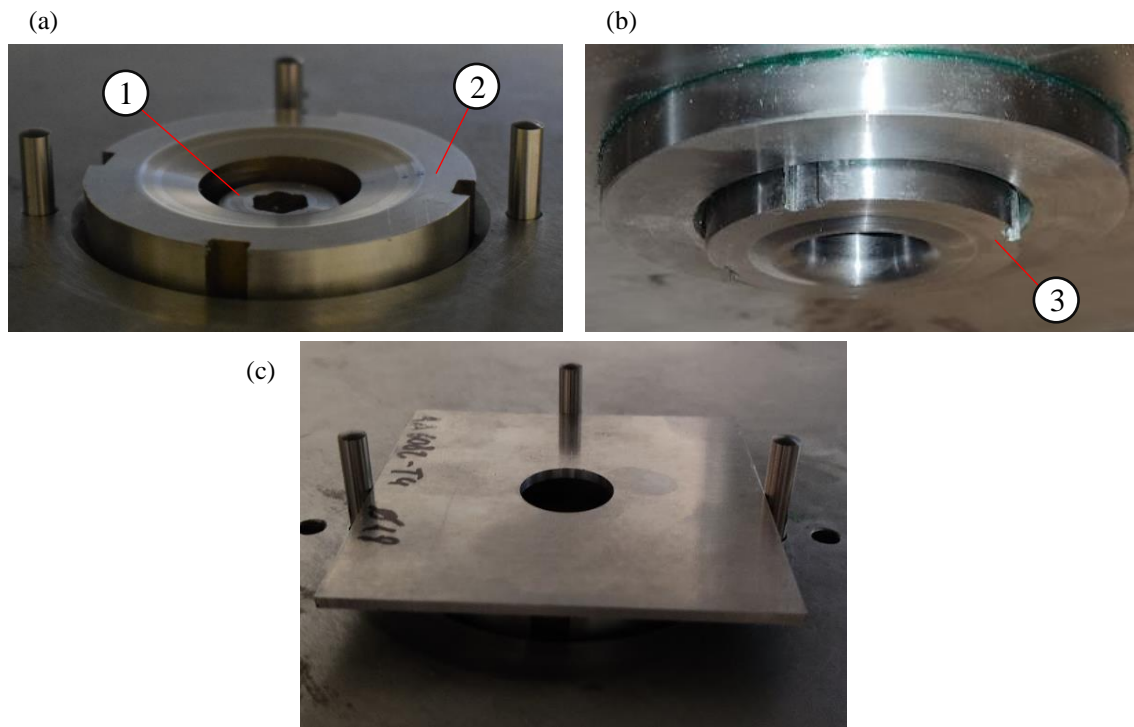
Flanging stage components and positioning of the outer sheet: (a) 1 – Flanging punch and 2 – bottom die, (b) 3 – upper die and (c) positioning of the outer sheet in the top of the bottom die by means of alignment pins.
